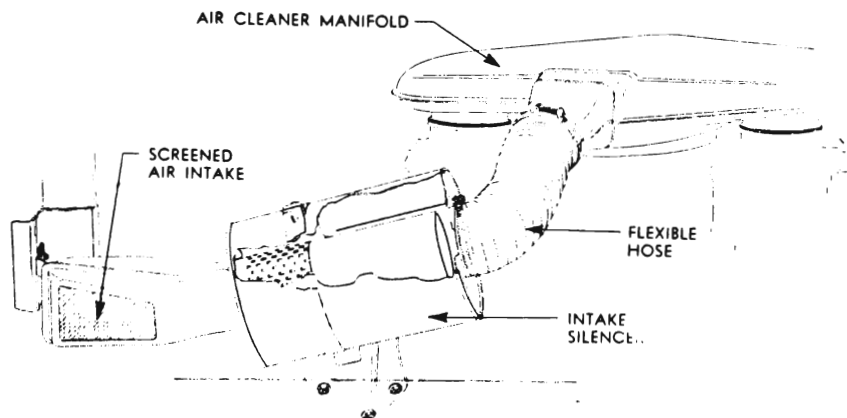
Air Intake and Silencer—Compound Carburetor
